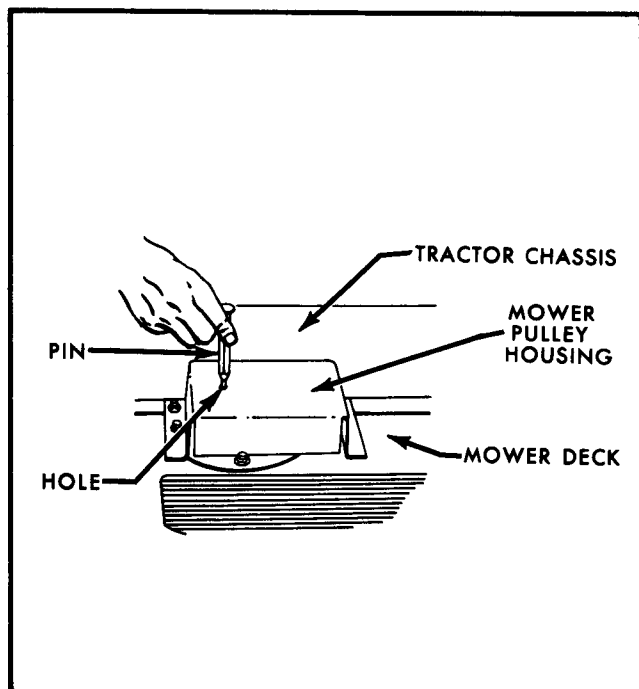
Locking Blade Pulley to Loosen Blade Nut
